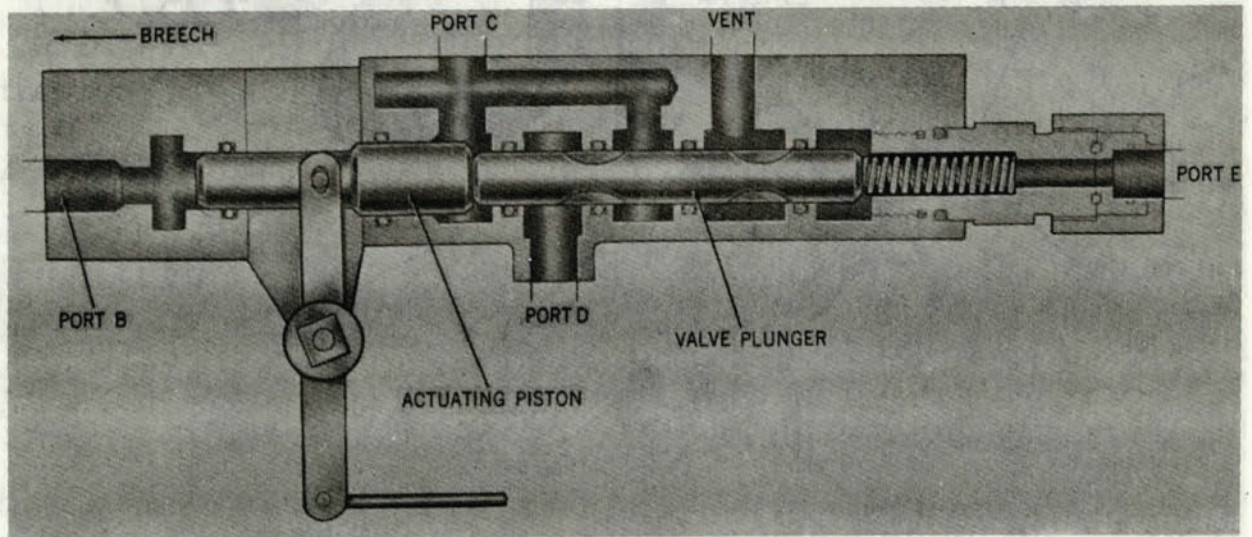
Poppet Valve Operating Unit—Poppet Valve Open—Sectional View.
